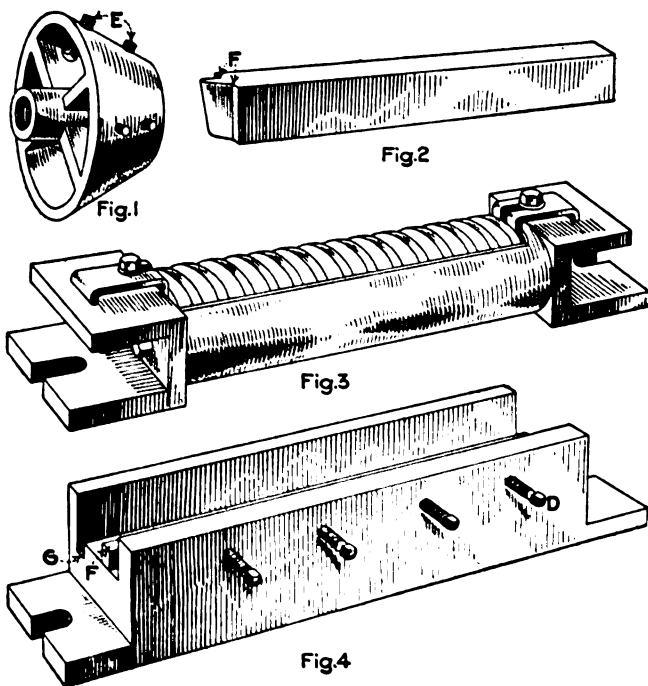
DETAILS OF JIGS USED IN MACHINING 8 V-MOTOR PARTS
